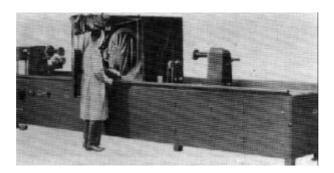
Largest bench-type magnetizing unit for large diesel crankshafts.
